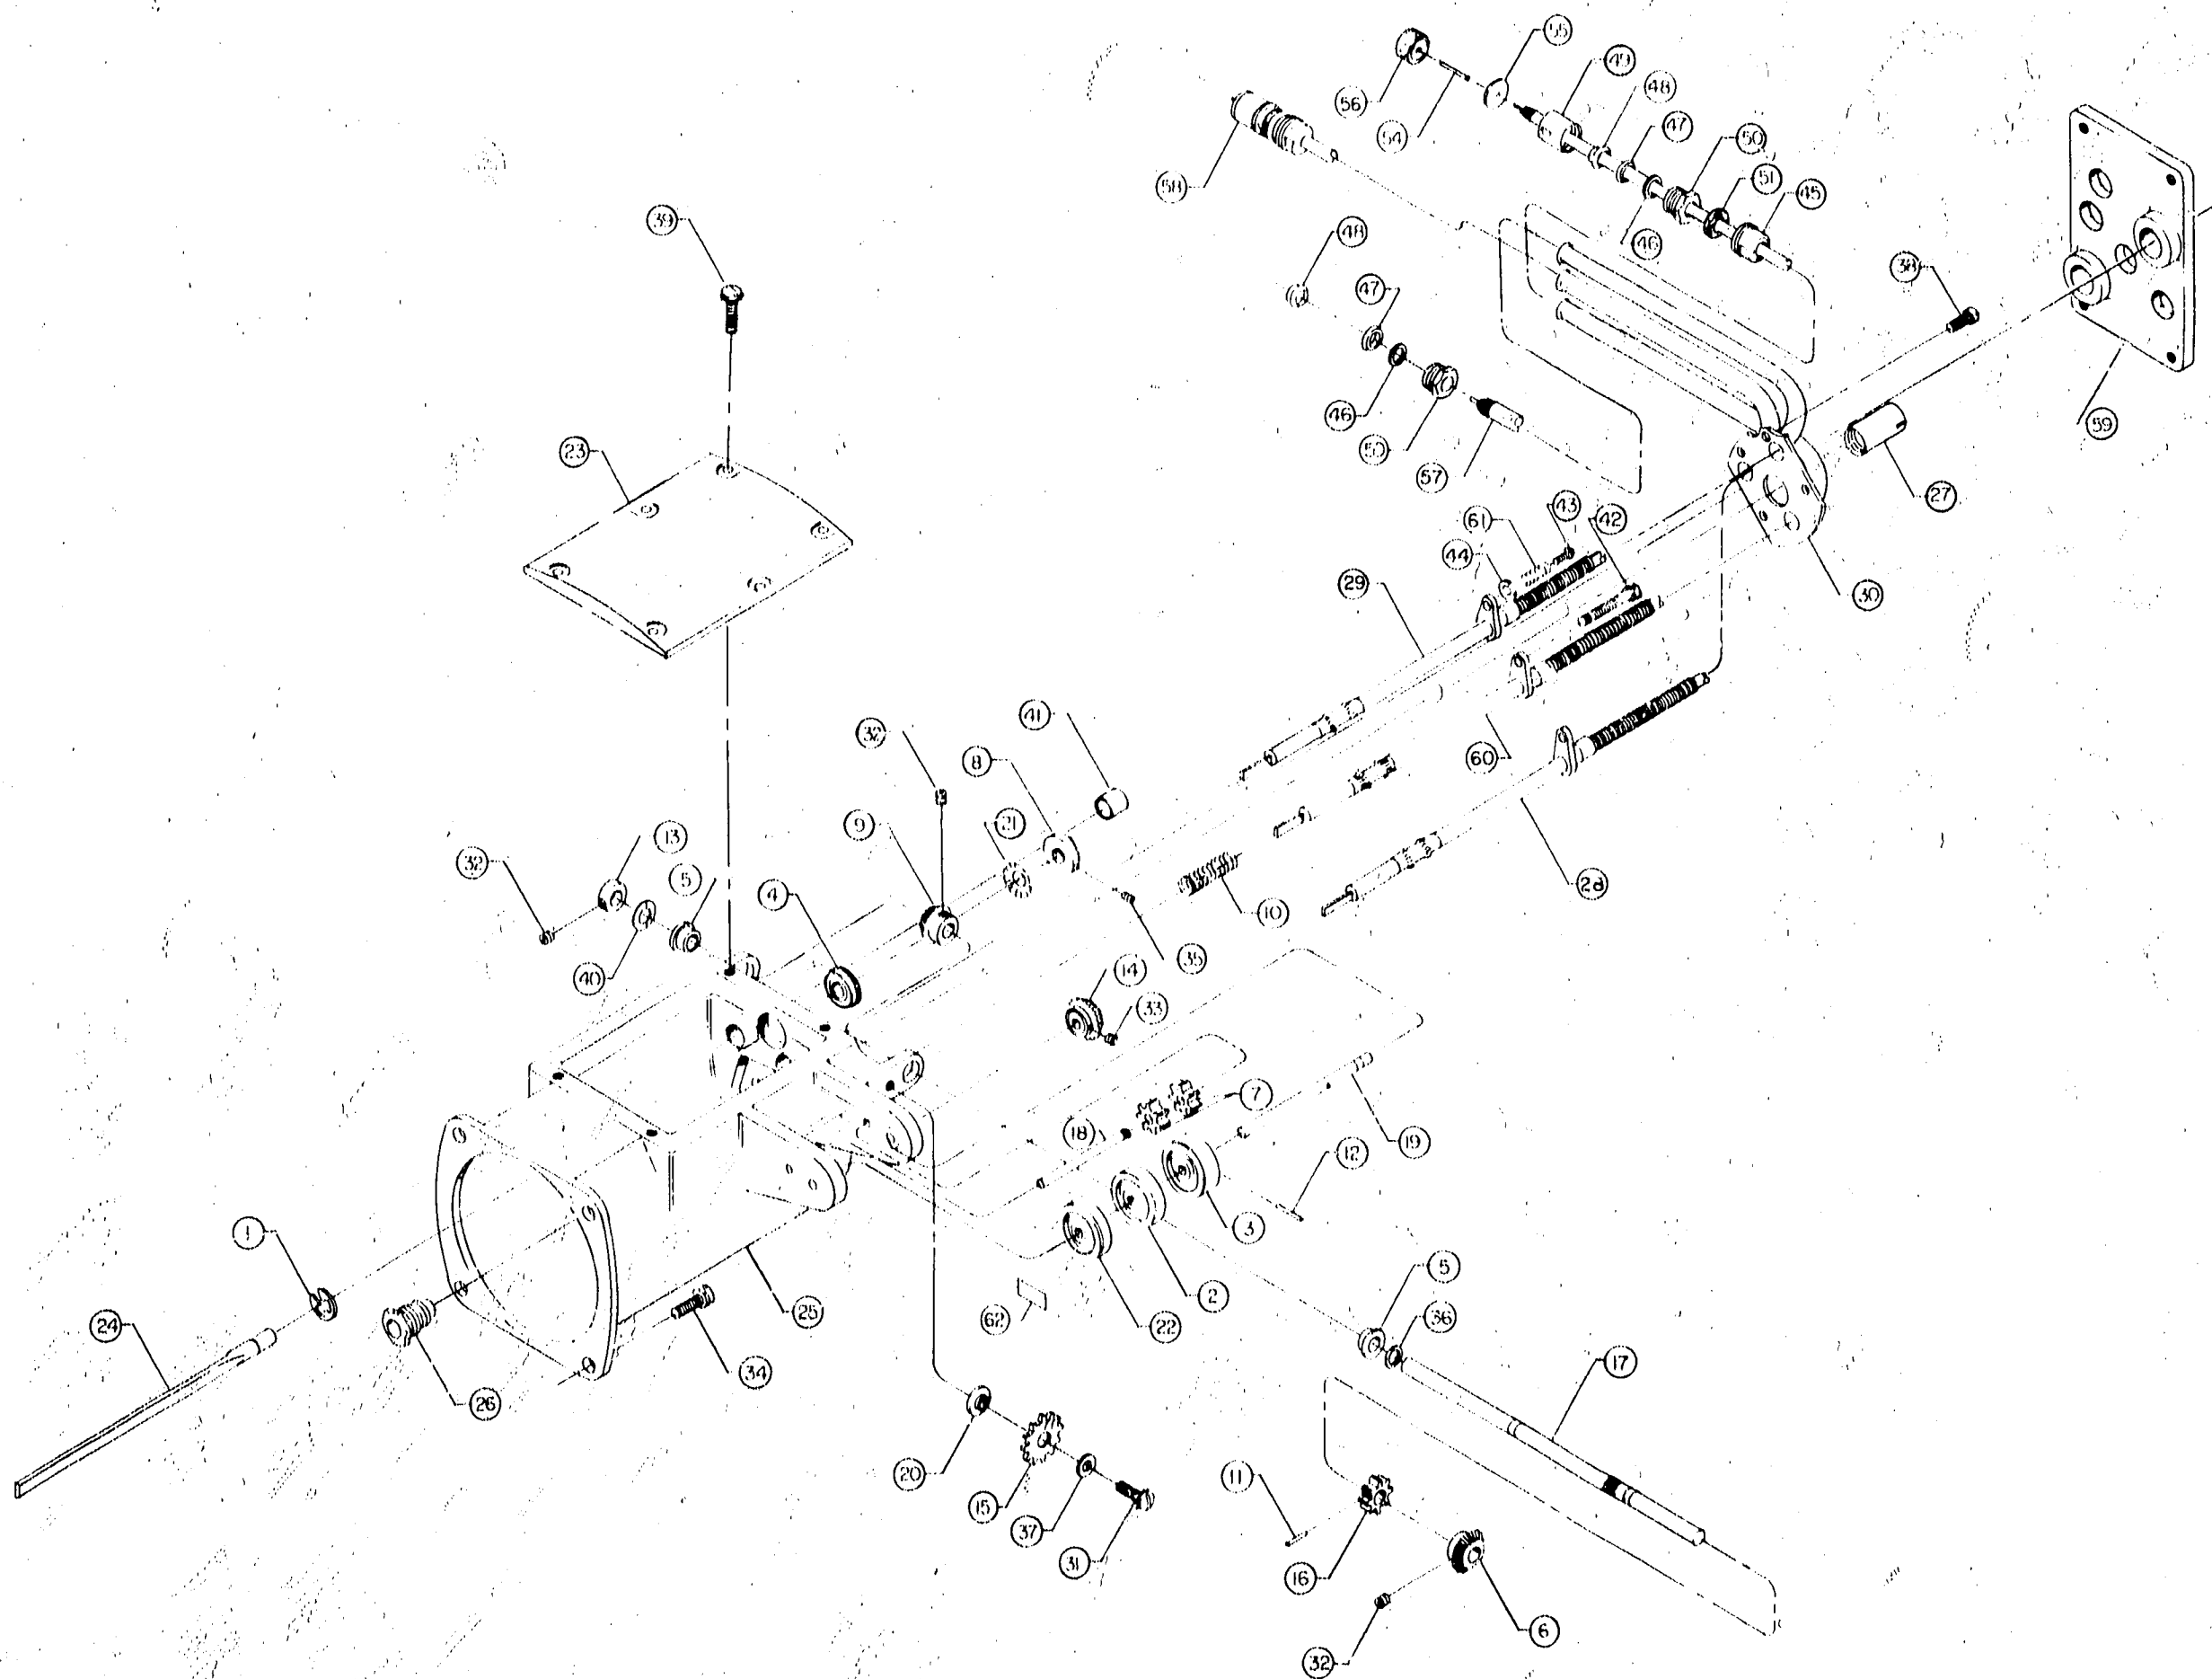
HP Model 8616A, Signal Generator, Probe Assembly
